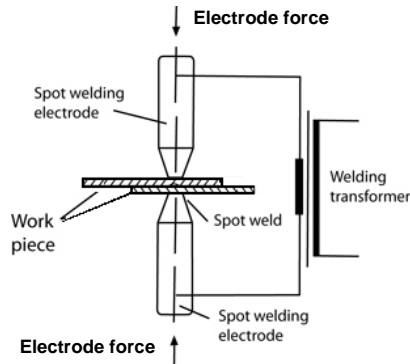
Parameters affecting the resistance spot welding [9]
